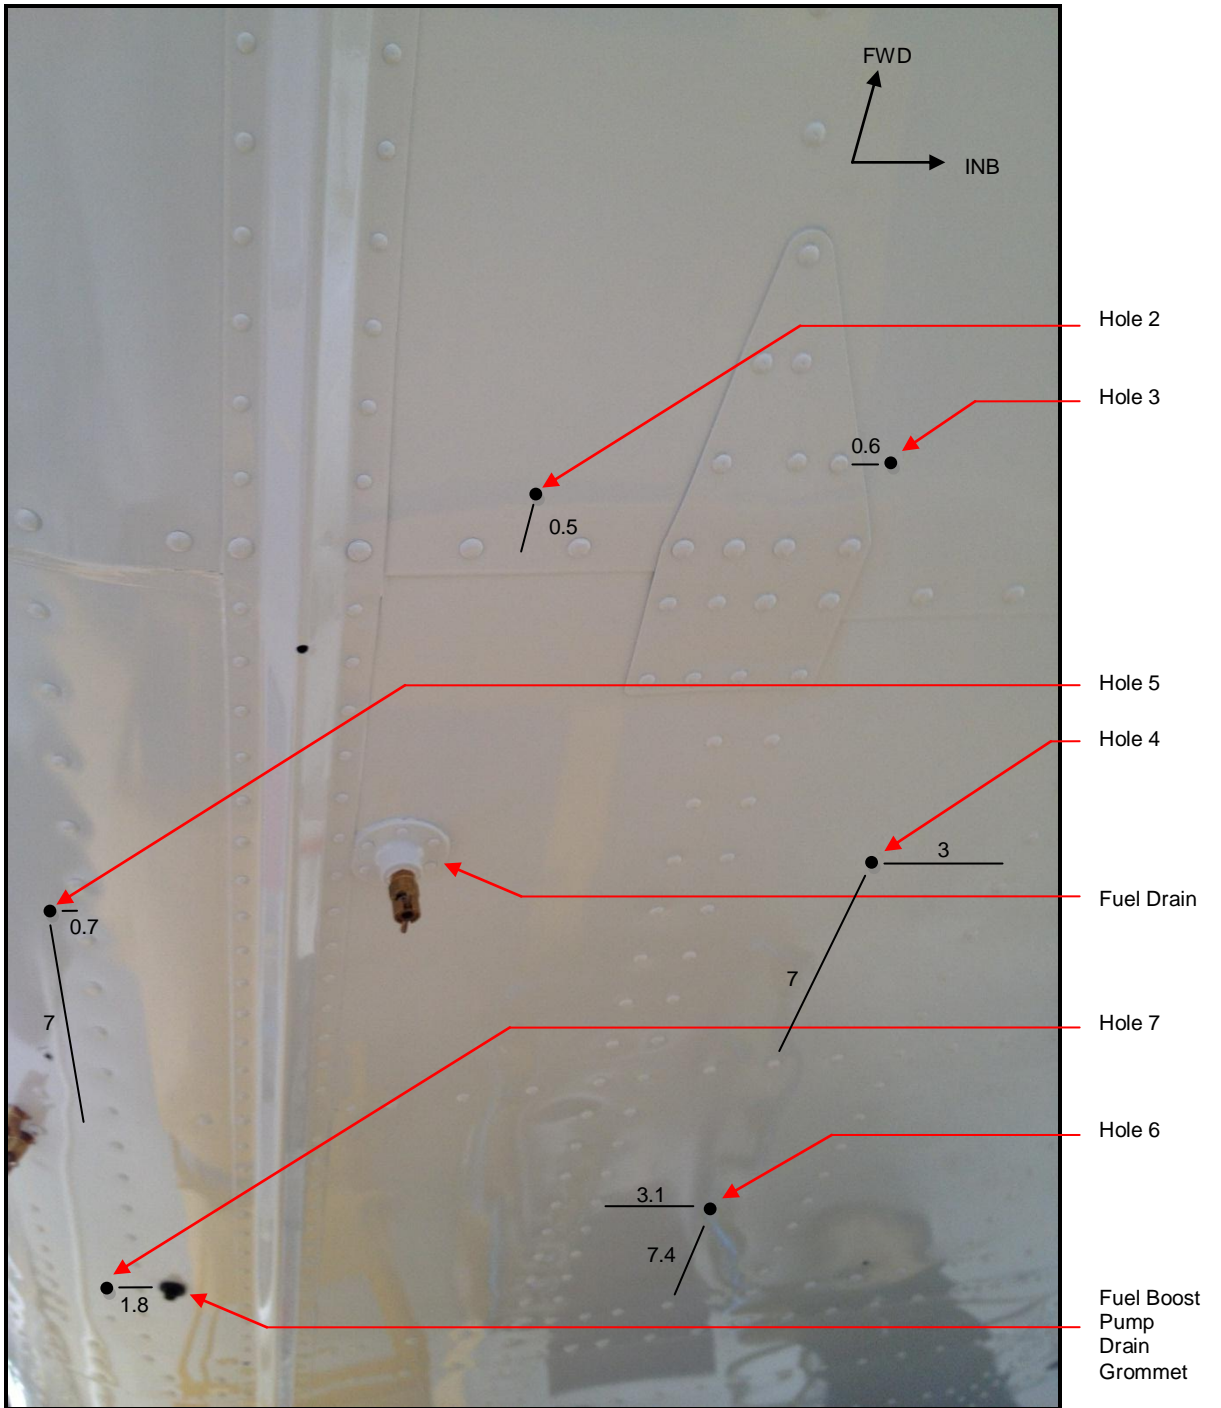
Hole Locations Viewed from Bottom of Belly Skin (Dimensions in inches)
